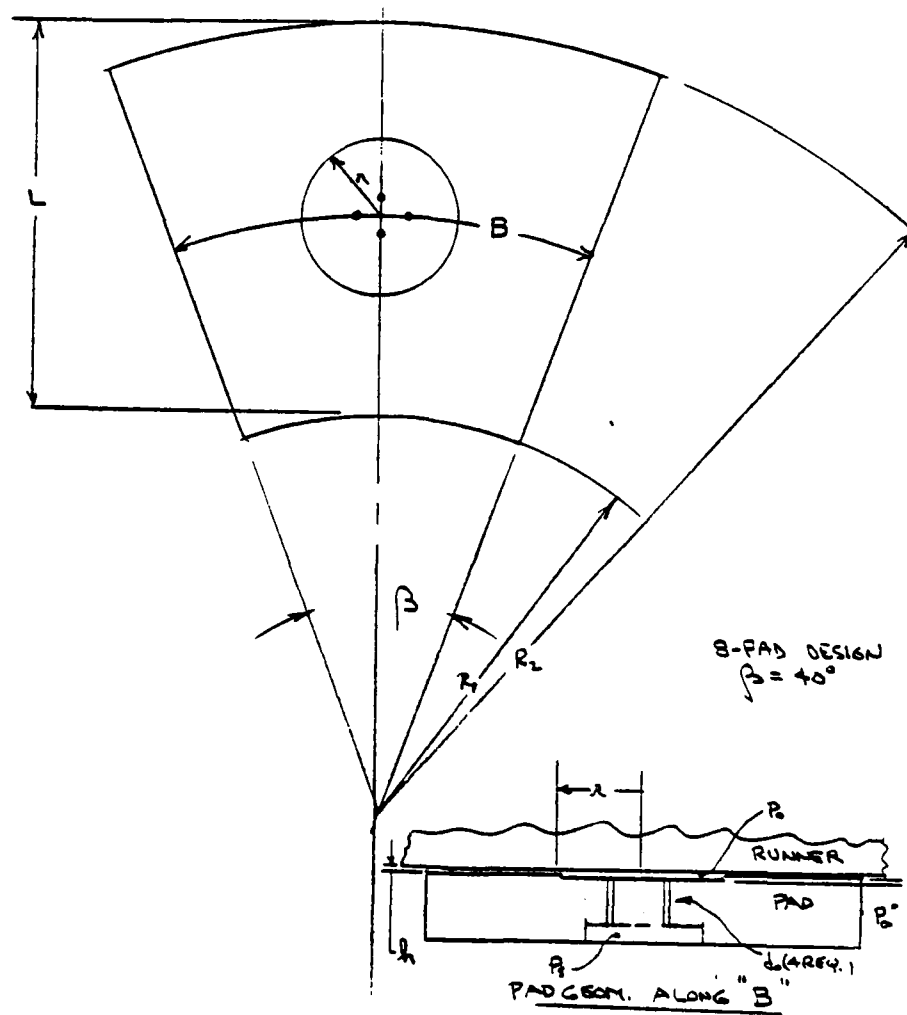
Hydrostatic Thrust Bearing Basic Pad Geometry
